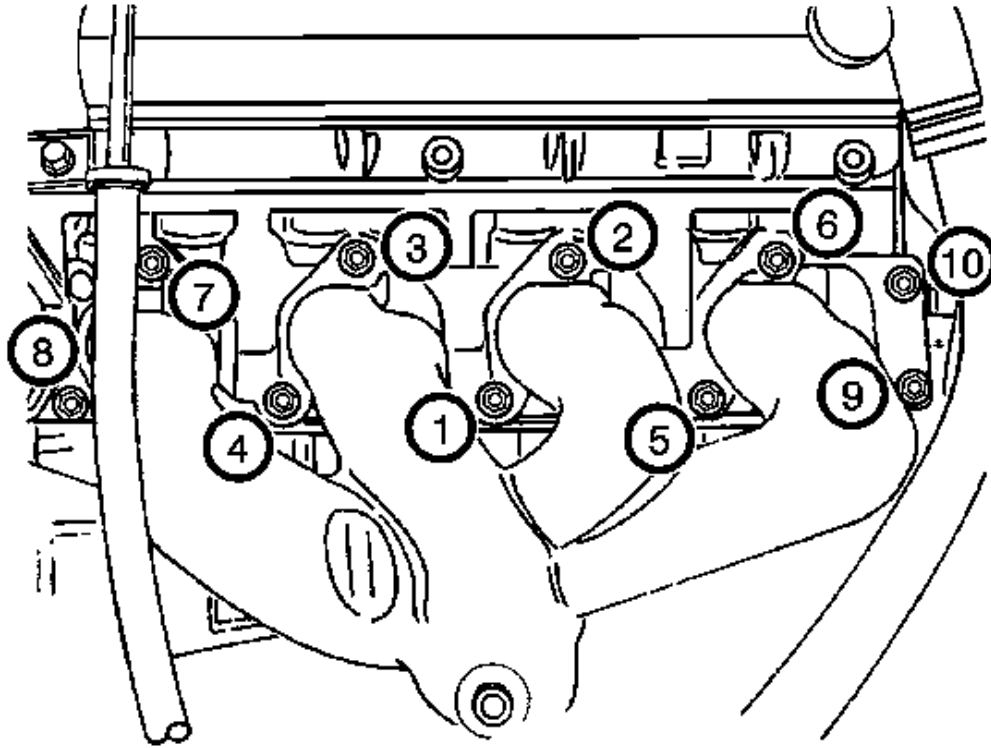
View Of Exhaust Manifold Retaining Nut Installation Sequence
